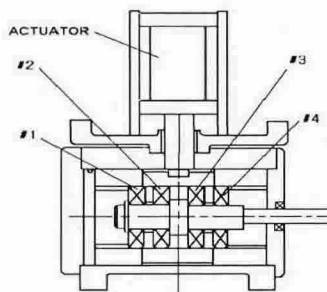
KBC Type Ball Bearing Life Tester (#1- #4 ; Test bearing position)
